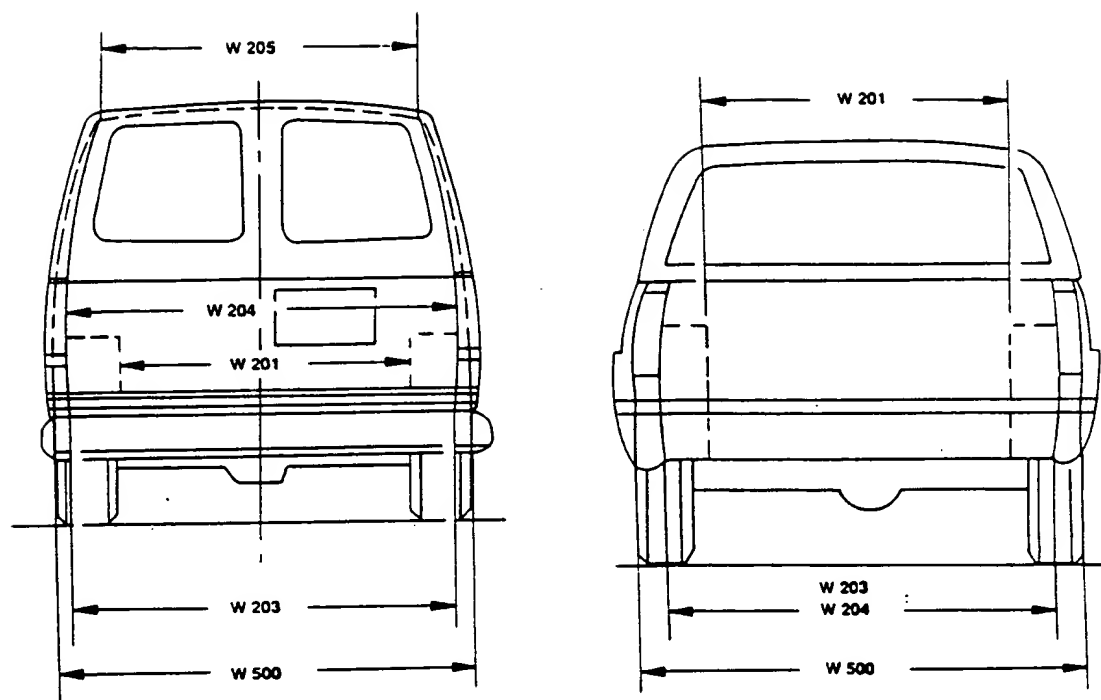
TRUCK-CARGO SPACE DIMENSIONS, WIDTH
